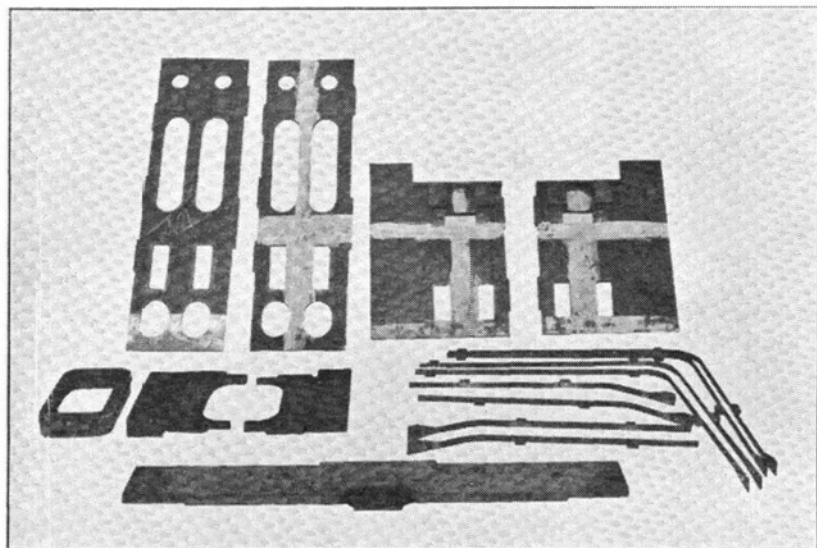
SOME OF THE PARTS PREPARED FOR ASSEMBLY
